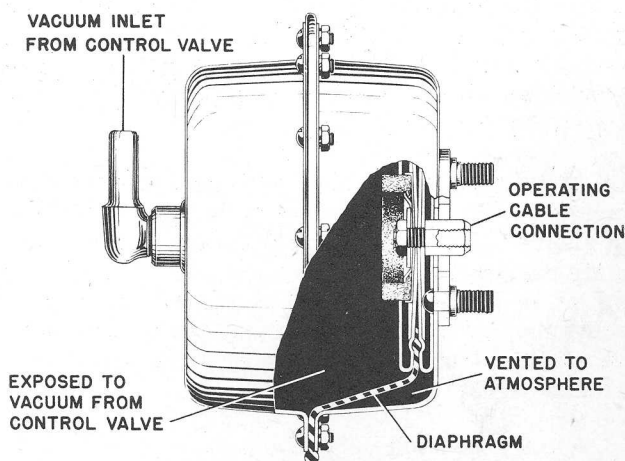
Cutaway of Clutch-Operating Power Cylinder Showing Details of Construction
